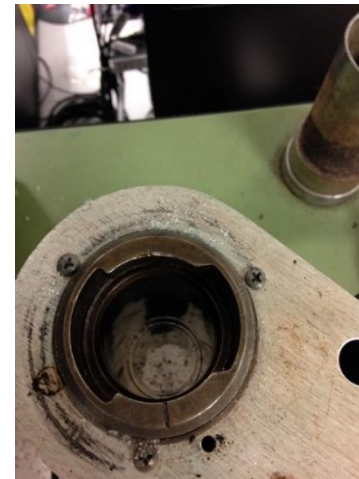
Moving die adjusted up to eliminate the space with the mold.
